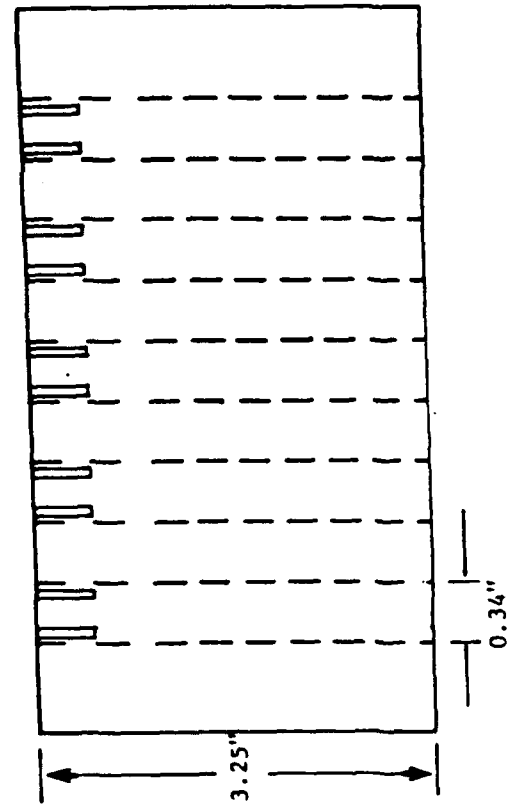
Section through the alignment jig showing positioning of the adhesively bonded test specimens.
